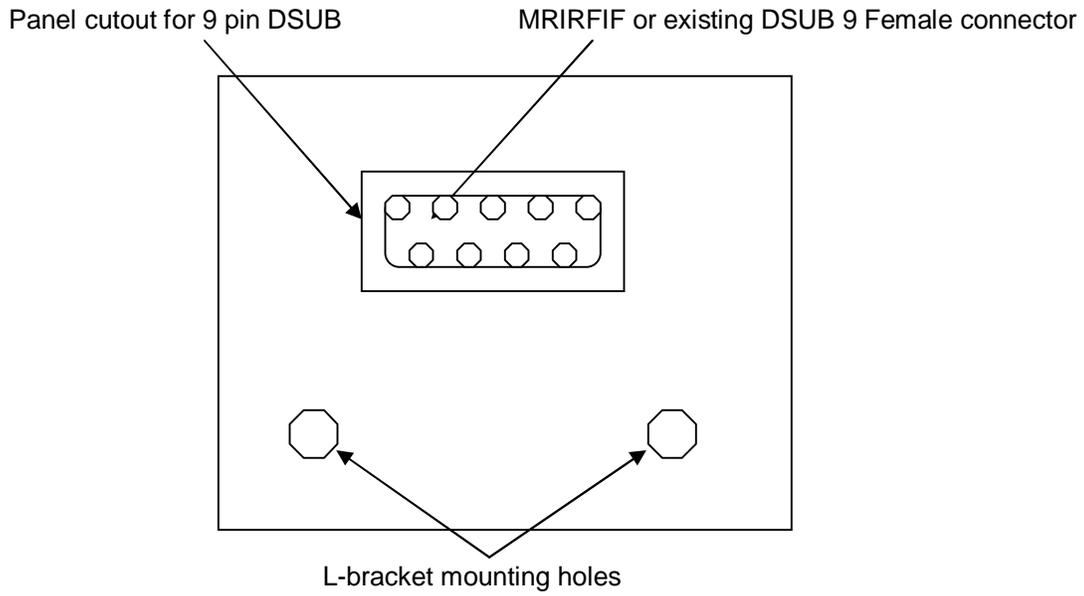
Chamber room view of cutout to support MRIRFIF mounting
